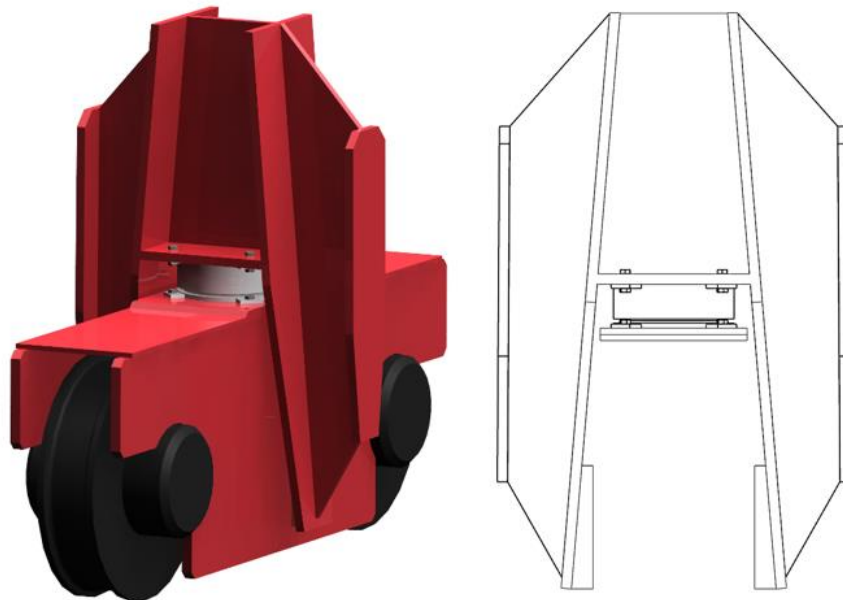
Definitive layout of pot bearing lower joint and supporting structure.
